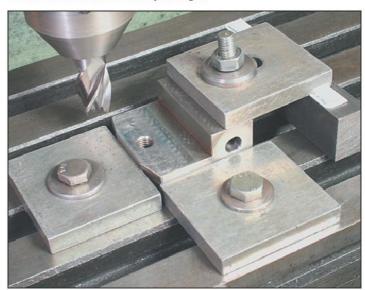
A single clamp is not ideal but if used with correctly placed support pieces, quite heavy machining can be undertaken.
